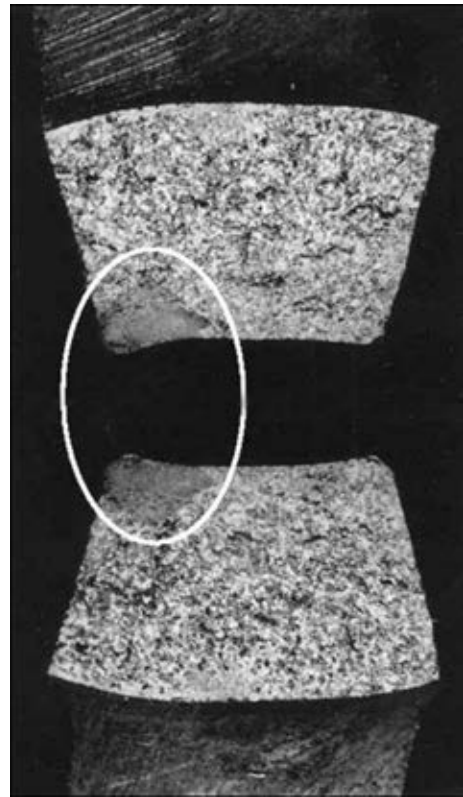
Fracture surface of specimen of joint, made by FBW, with LSH (marked in oval) tested for impact bending
